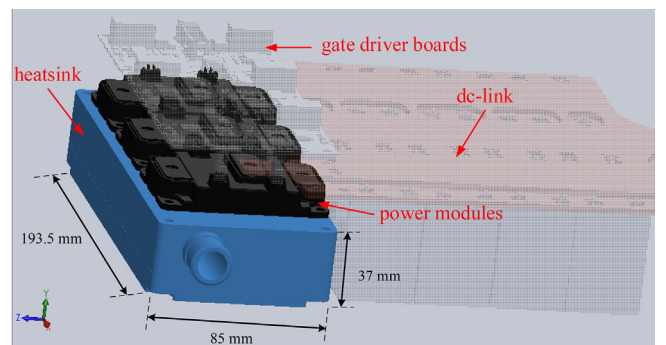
CAD drawing of the designed inverter with the heatsink highlighted and its outer dimensions shown.
